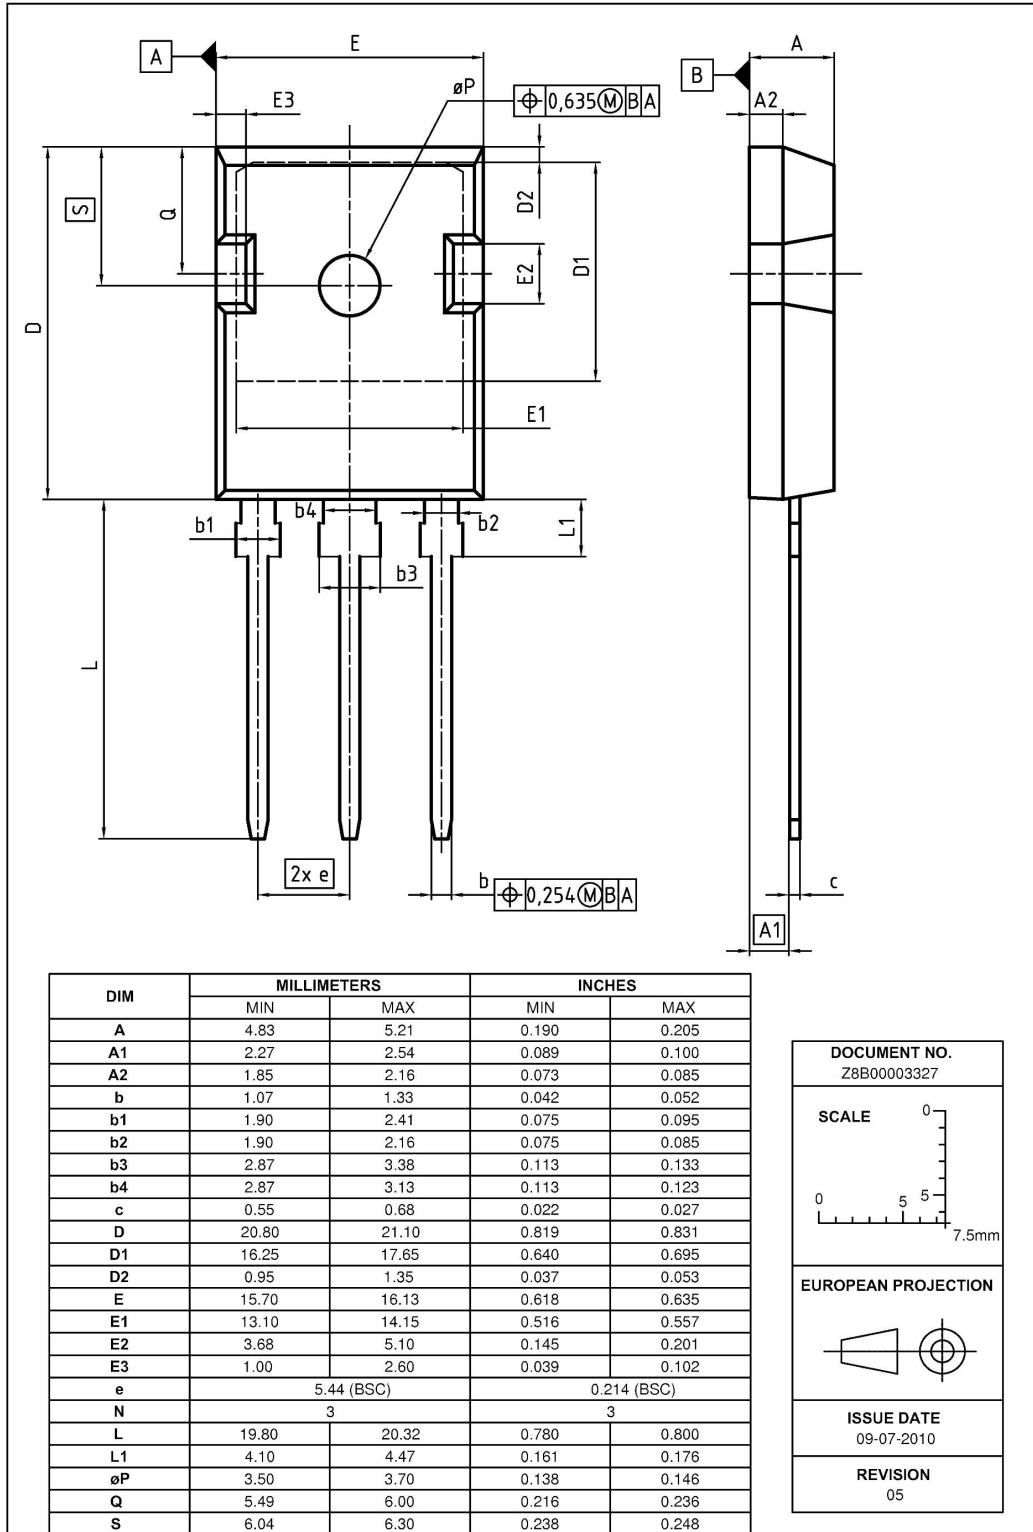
Outline PG-TO 247, dimensions in mm/inches
